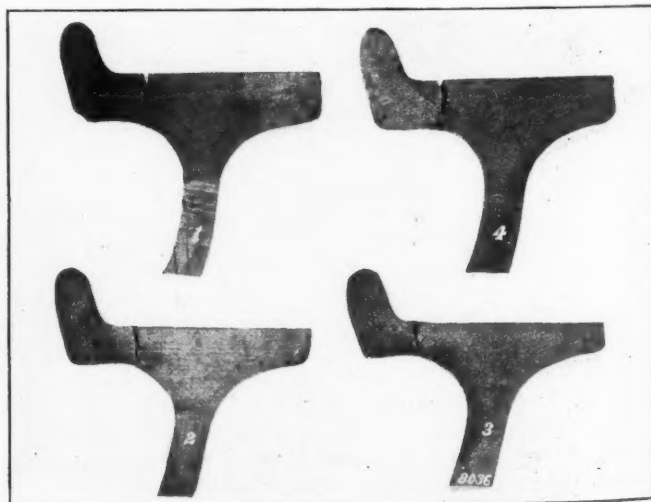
Failures of 1-in. Sections Taken From Steel Wheels.
